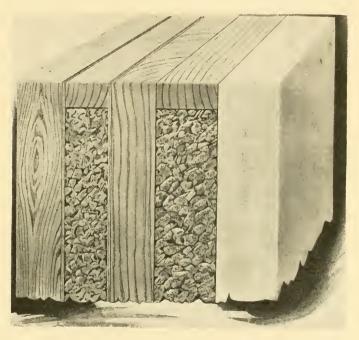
JEWETT REFRIGERATOR WALL SECTION.
